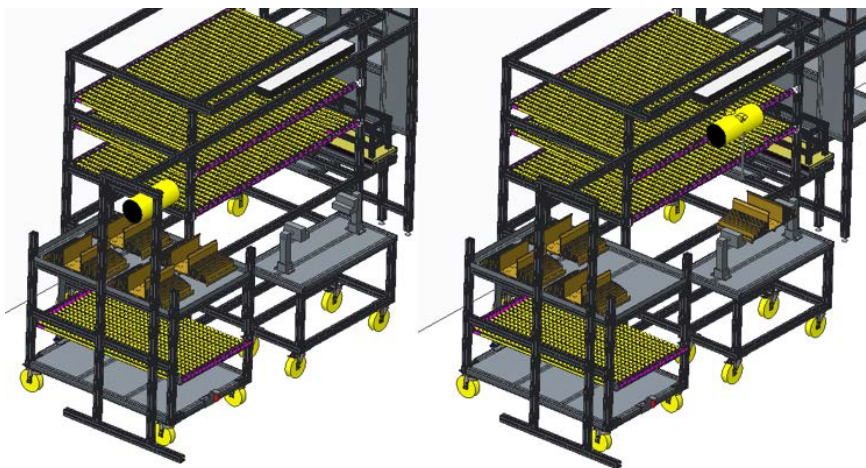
Extrusion being picked from supply car and being placed on the JIG
